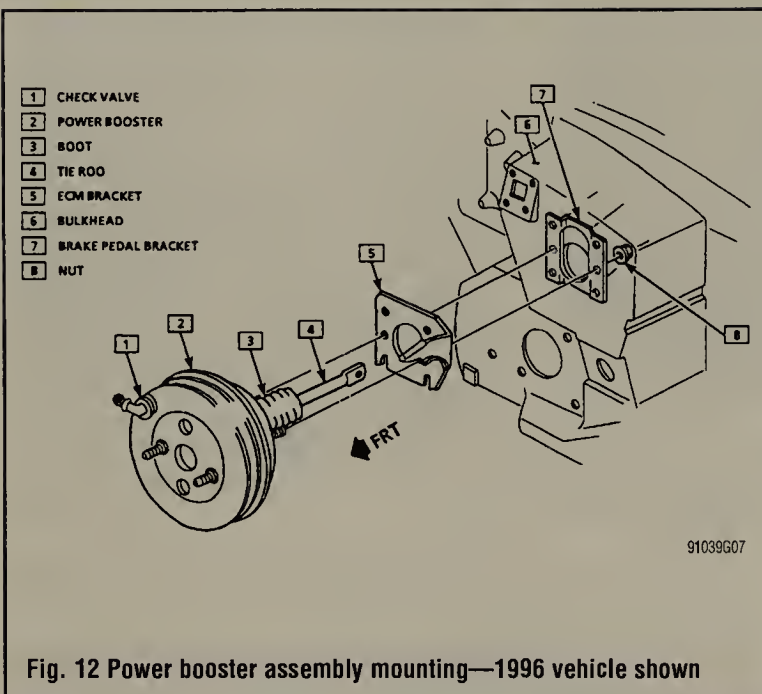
Power booster assembly mounting—1996 vehicle shown
